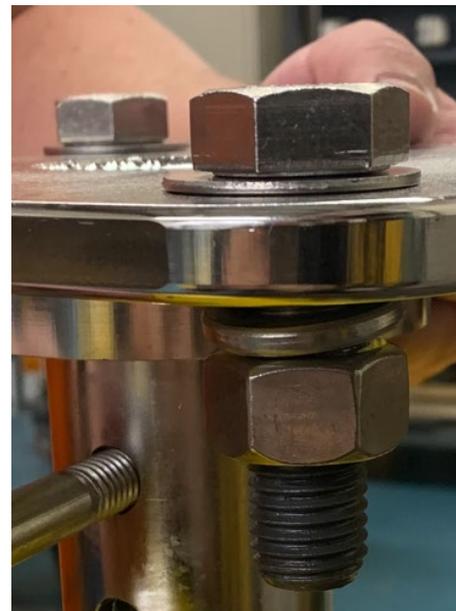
3400 Light and Ultra-Light Adaptor Flange Plate Screw Assembly Locations
